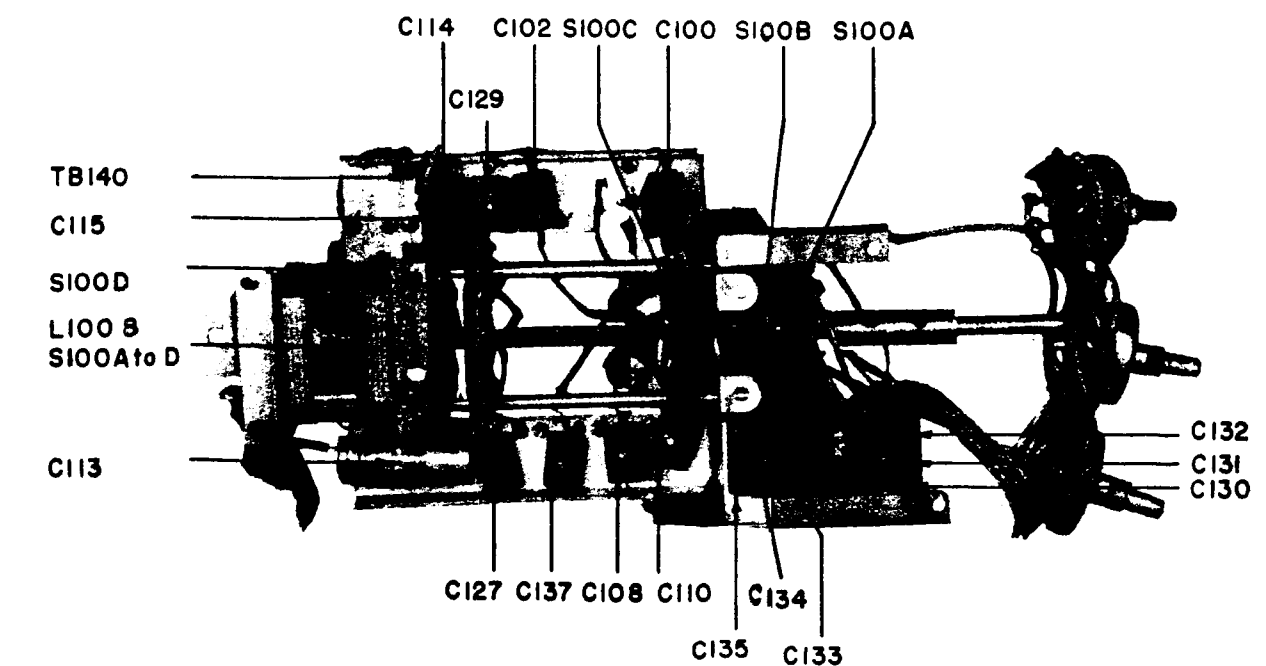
HARMONIC SELECTOR ASSEMBLIES WS Cdn No. 29 (BOTTOM VIEW)
